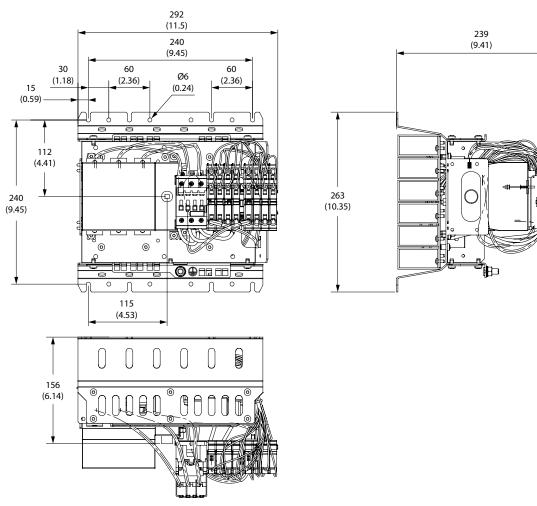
Dimensions of the Pre-charging Unit in mm (in), UL
